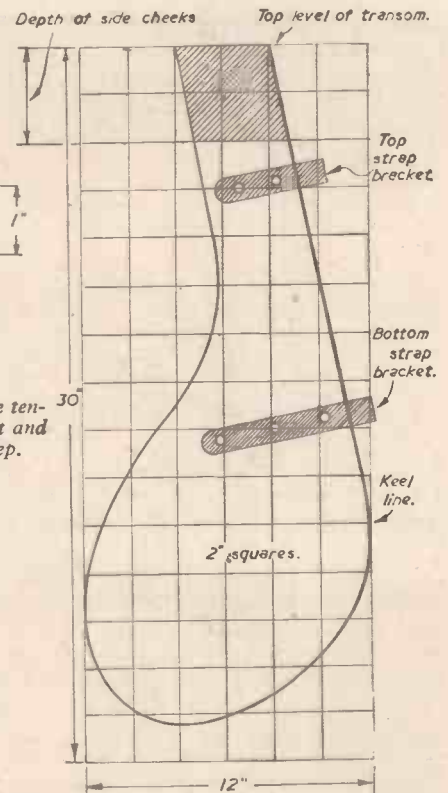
Dimensions and shape of the rudder and position of brackets.
